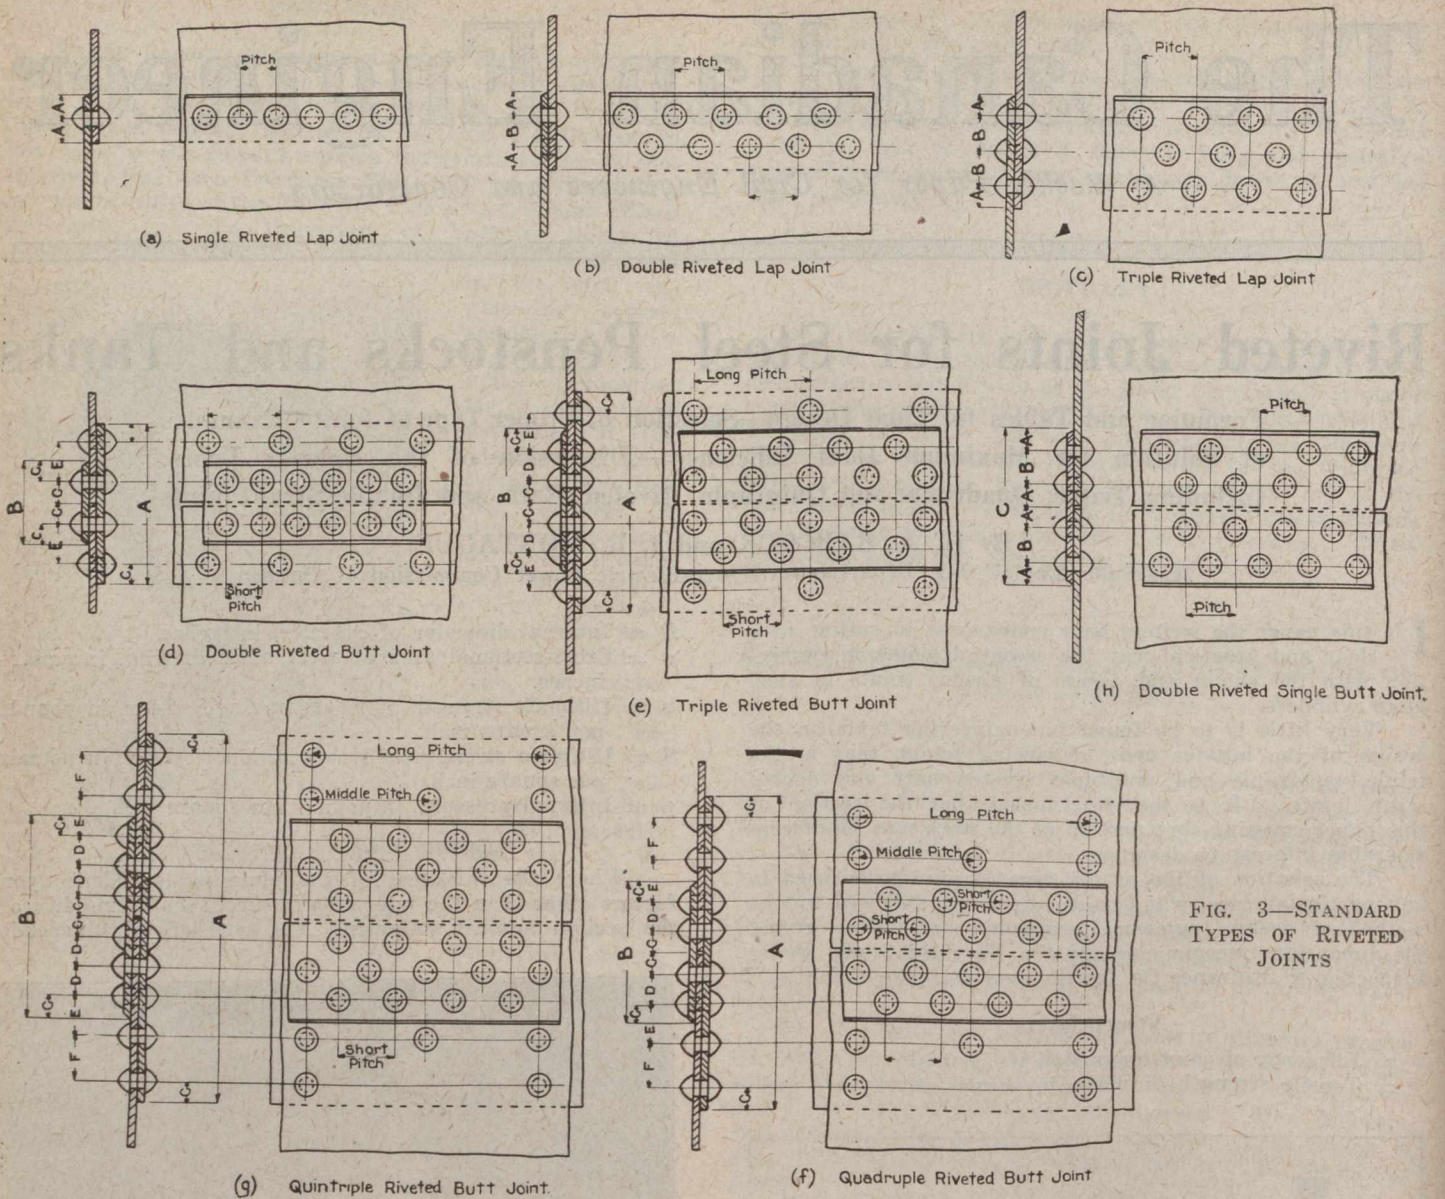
STANDARD TYPES OF RIVETED JOINTS
